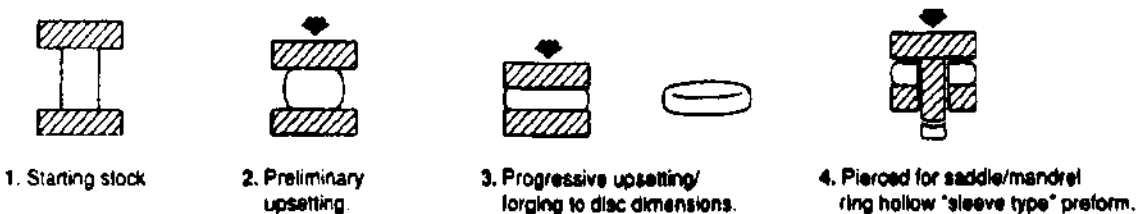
A4a Open-die forging of shafts and discs. Repeated press strokes with a flat or simple-shape die form the workpiece. (Courtesy Forging Industry Association.)
